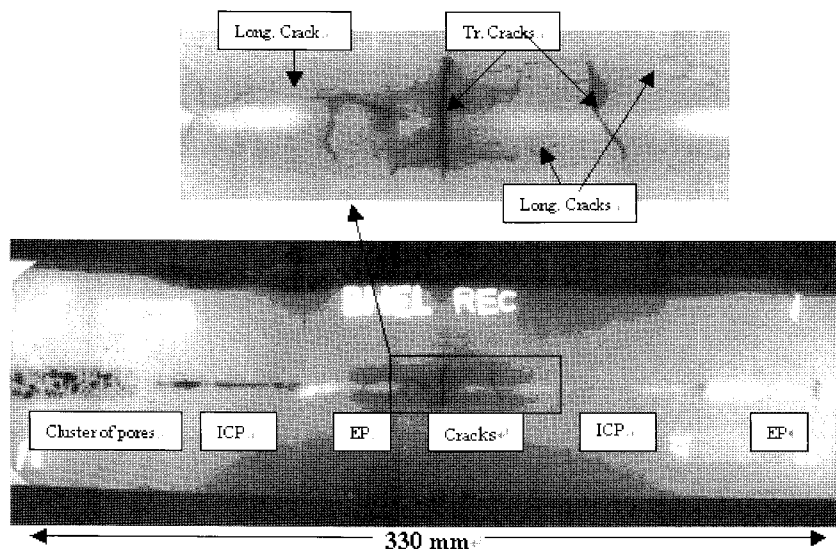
Radiograph showing planar location of different defects in the weld pad
